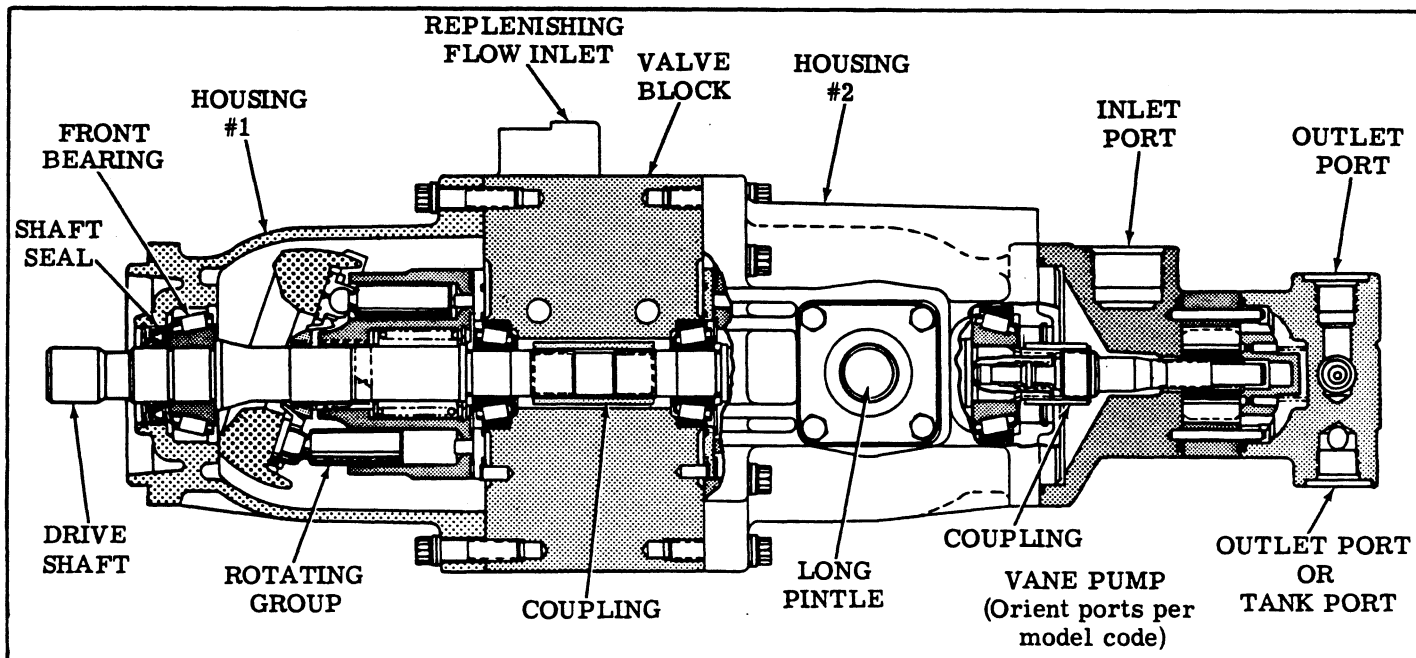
Sectional View of Typical Double Transmission Pump Package.
